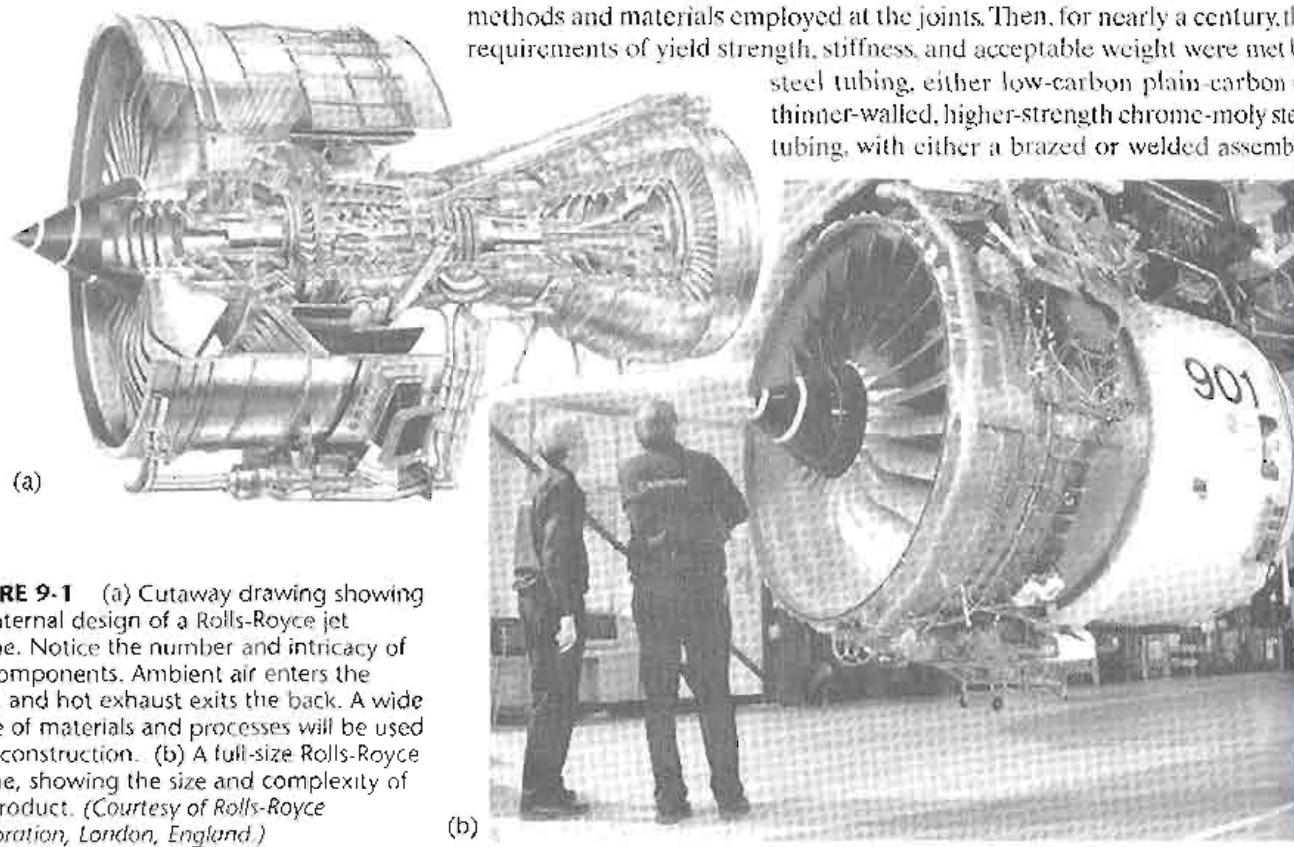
(a) Cutaway drawing showing the internal design of a Rolls-Royce jet engine. Notice the number and intricacy of the components. Ambient air enters the front, and hot exhaust exits the back. A wide range of materials and processes will be used in its construction. (b) A full-size Rolls-Royce engine, showing the size and complexity of the product. (Courtesy of Rolls-Royce Corporation, London, England.)
